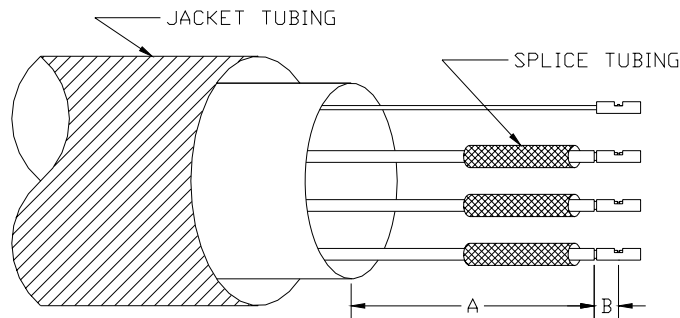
Typical Installation - 3 Conductor Cable with Ground
